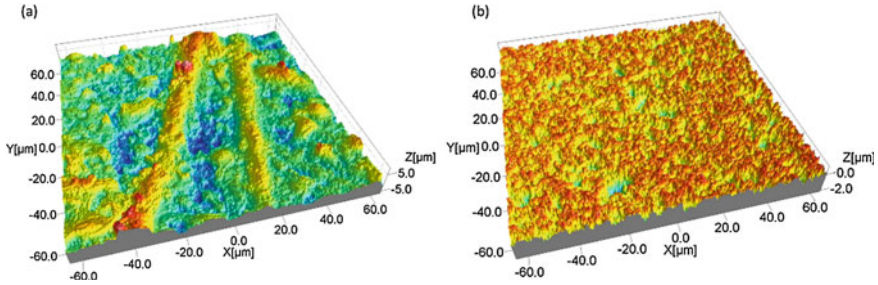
Details of machined surfaces for ZrB20f (a) and ZrB20w (b) machined by pulse type A
